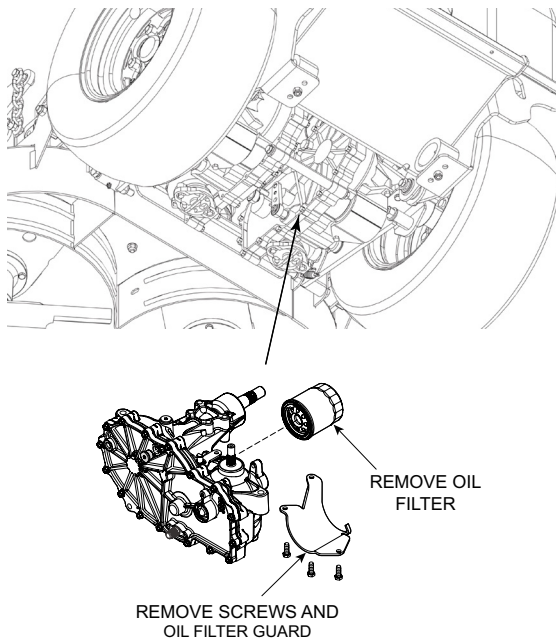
Hydraulic Oil Filter & Drain Plug
